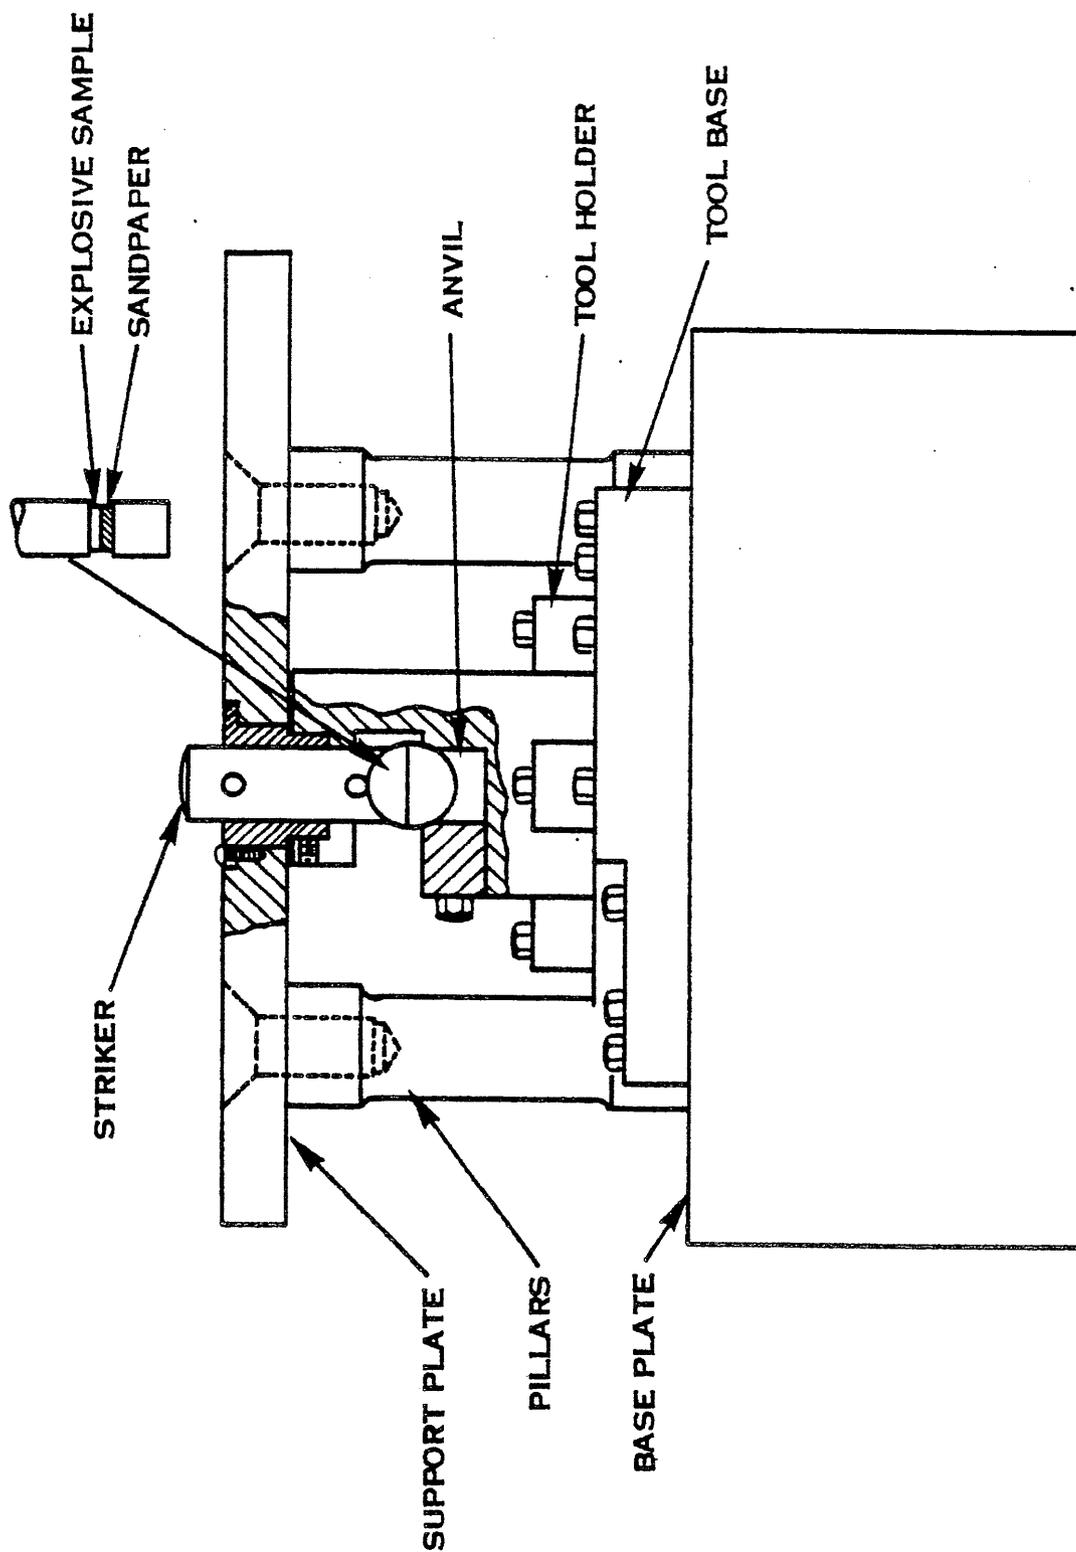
TOOL HOLDER ASSEMBLY TYPE 12 TOOLS
